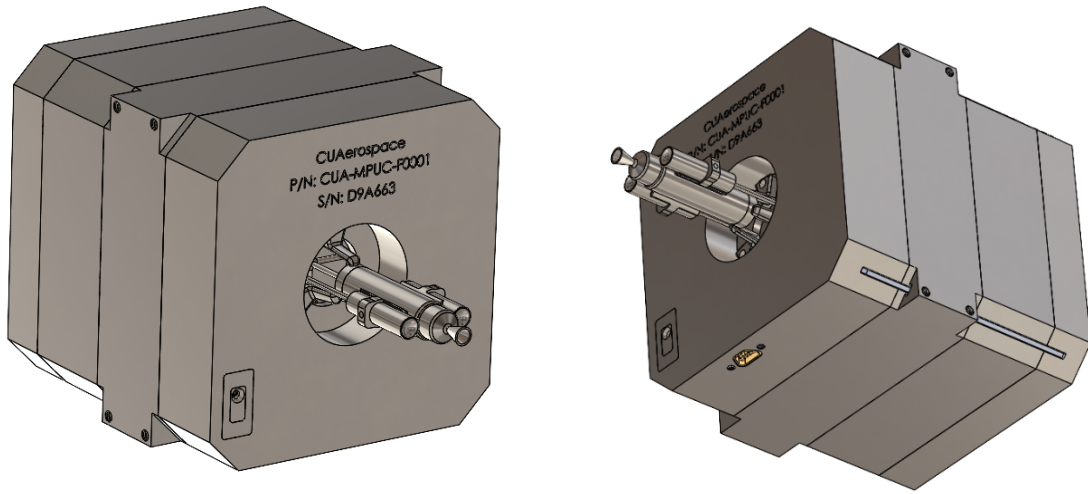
Trimetric view of CTF-T flight-like thruster head with flight feed system.
